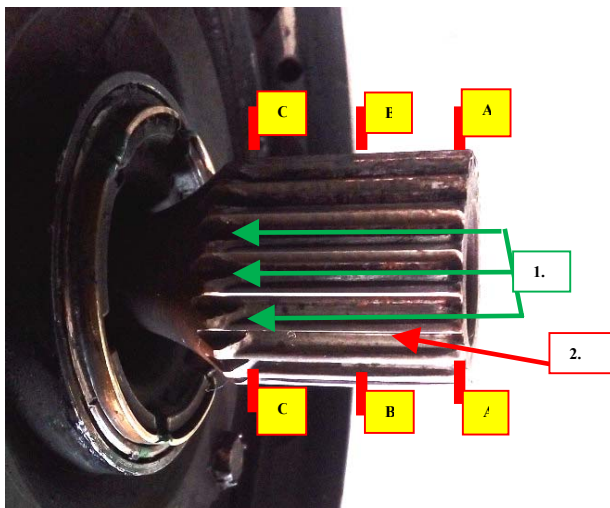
Worn-out (inner) splines of generator transmission shaft: 1. – material defects on tooth contact edges, 2. – reduction of tooth thickness (defect above 50%), A-A, B-B, C-C – planes of measuring splines (by using a slide caliper)
